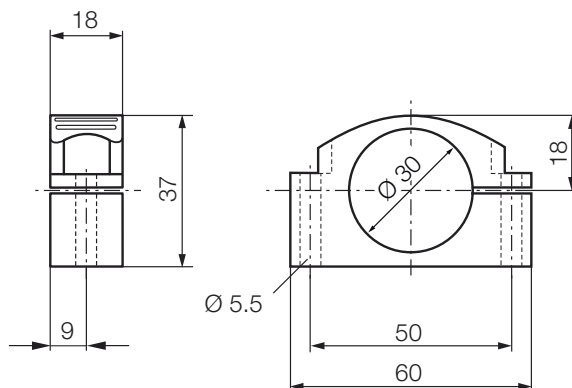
Mounting cuff BTL6-A-MF03-K-50
